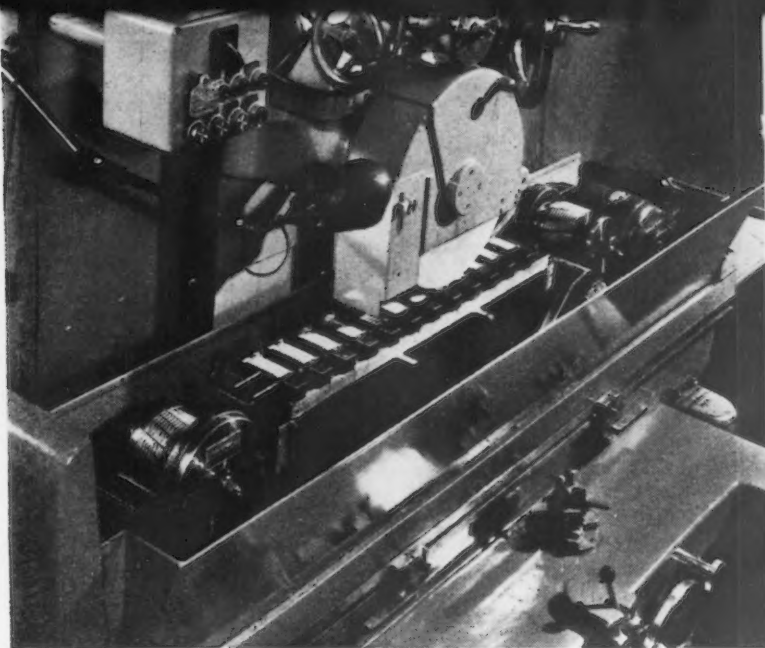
The master and work roll principle of Crustrue forming is shown forming this 220 grit 3 in. wide vitrified wheel for grinding 12 pinking shear blades simultaneously on a surface grinder. Crush dressing time is 1 min.
